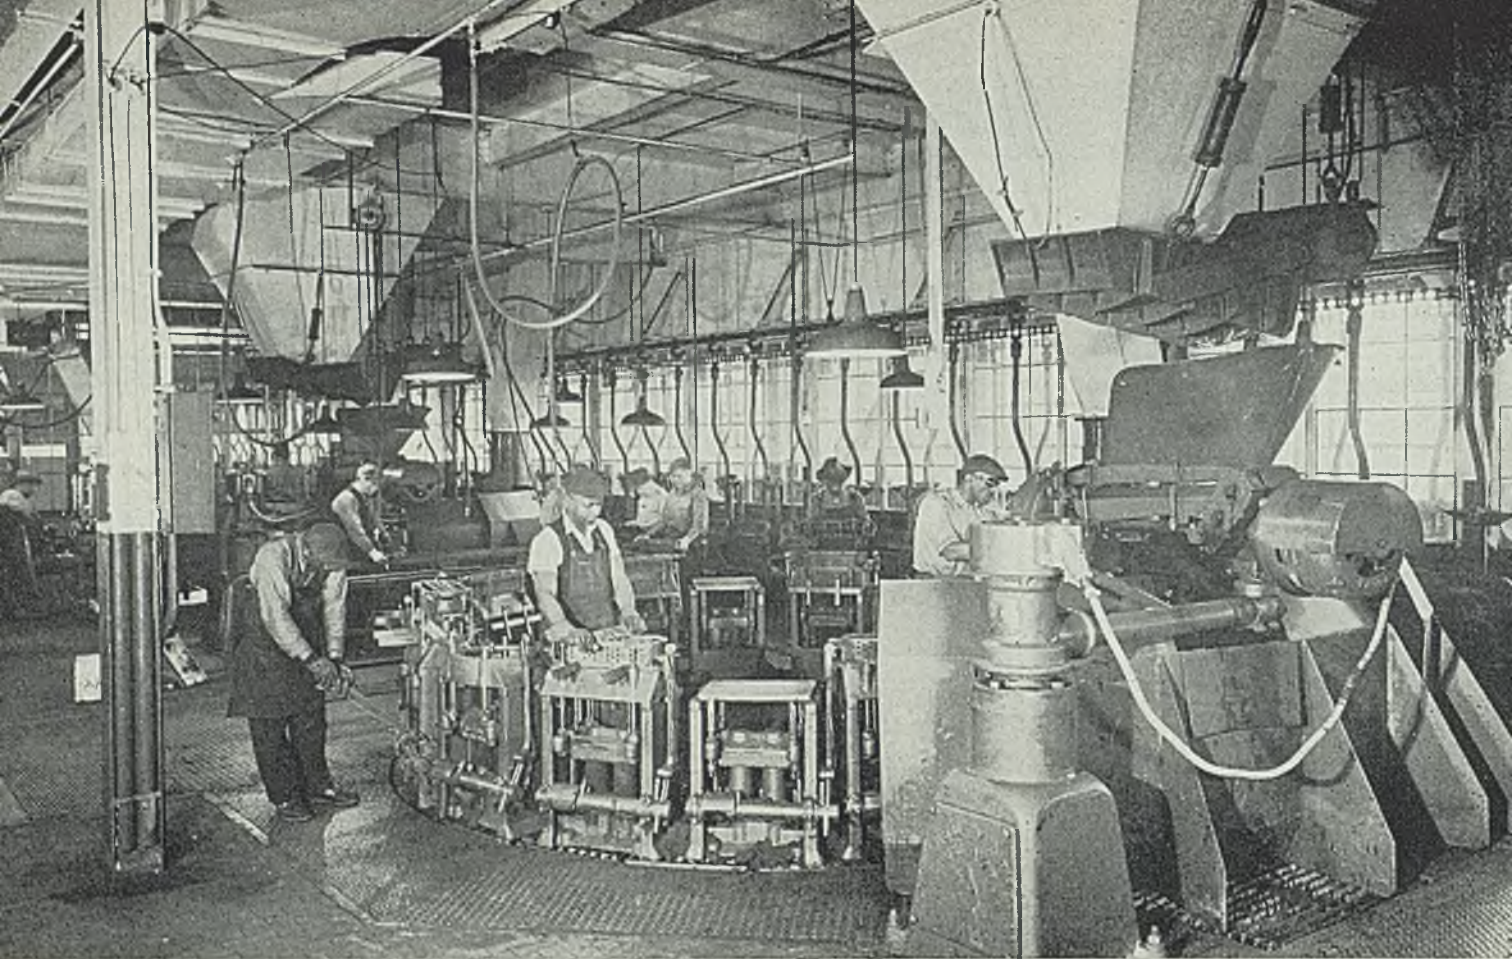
General view of piston molding unit with cope machines in the foreground and pendant conveyor line at the back
